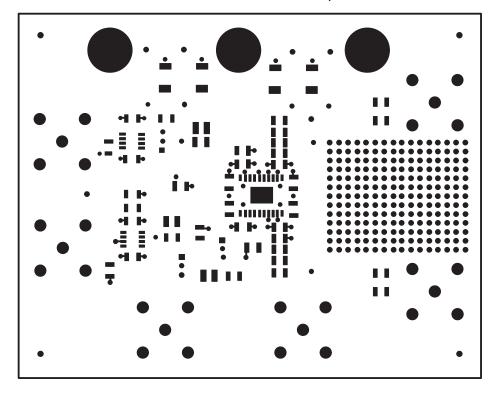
THS6002 EVM PC Board: Solder Mask — Top Side
